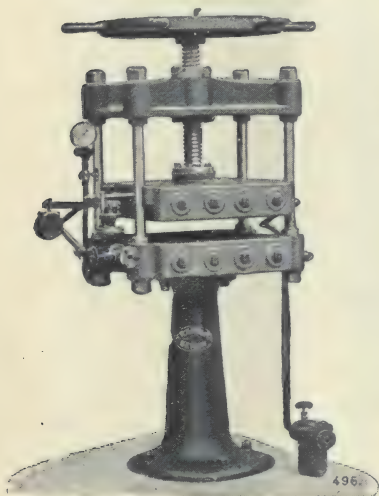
Single-screw vulcanising press with all accessories. Plates, 600 by 600 millimetres.
